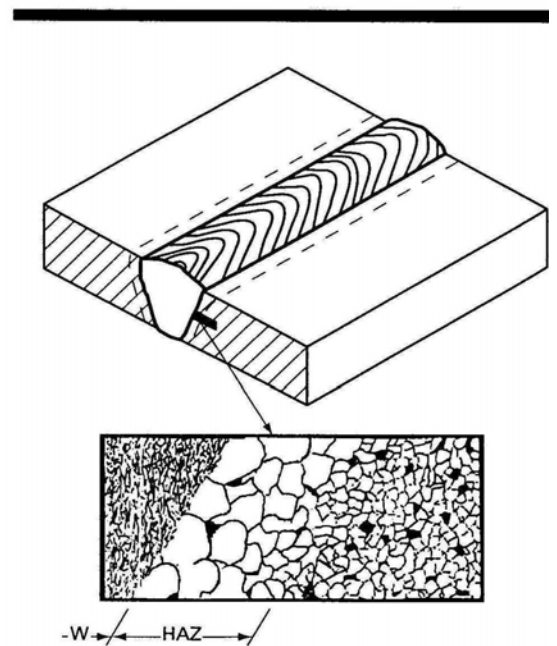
Single-Pass Weld in Steel, Showing Weld Metal (W) and Coarse-Grained Heat-Affected Zone (HAZ)
